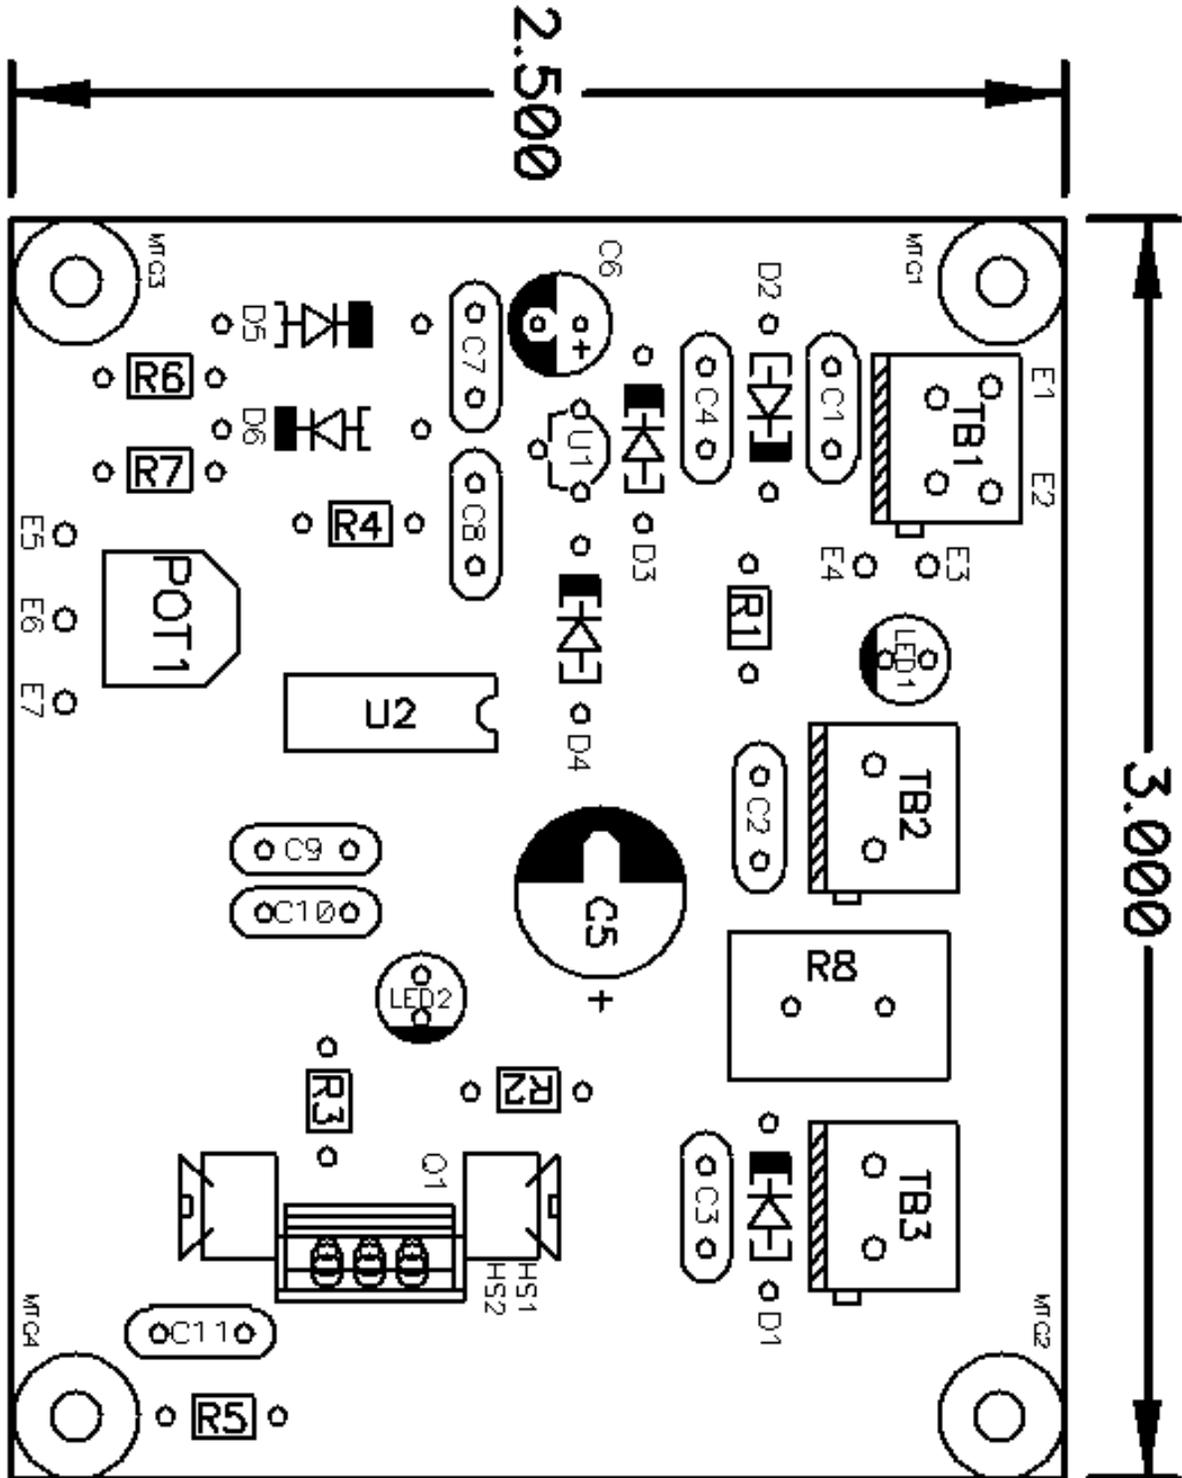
Component Locations and Reference Designators. Board rotated 90 degrees.
